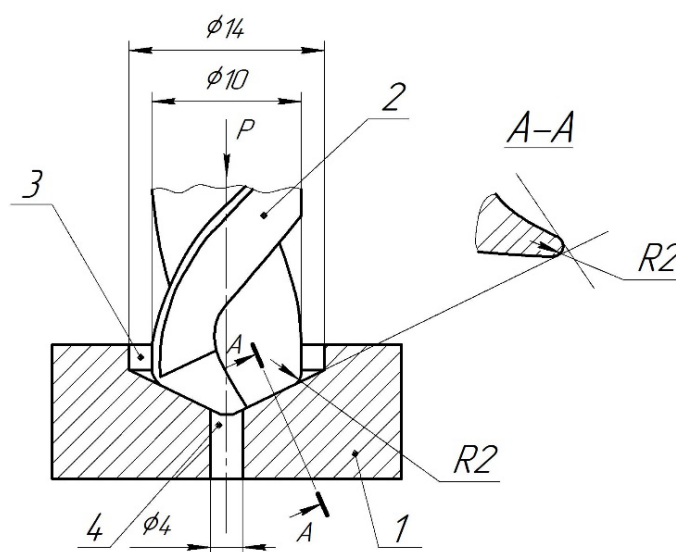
Geometry of the cutting edge of a modified drill (indenter):
